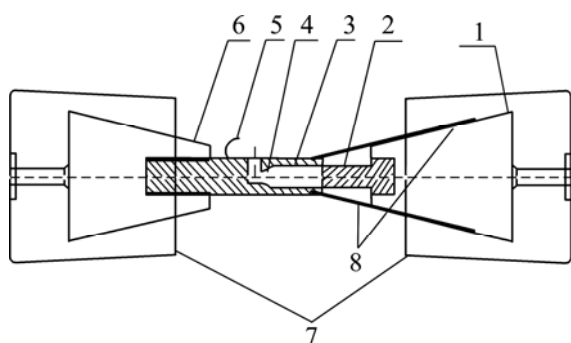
Illustration of ES die and equipment style: 1—Right support; 2—Extrusion ram; 3—Container; 4—ES forming zone; 5—Thermocouple; 6—Left support; 7—Fixtures of simulator; 8—Copper film
